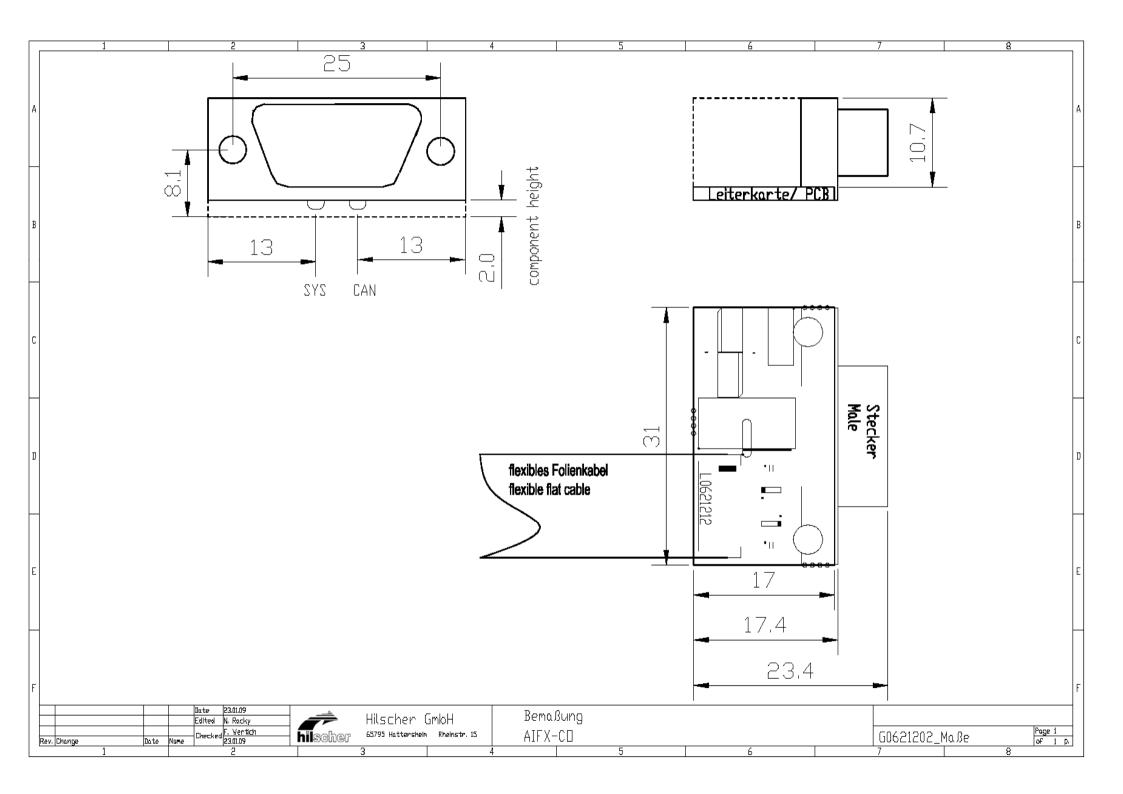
Device Drawing Assembly interface AIFX-CO (back side)
